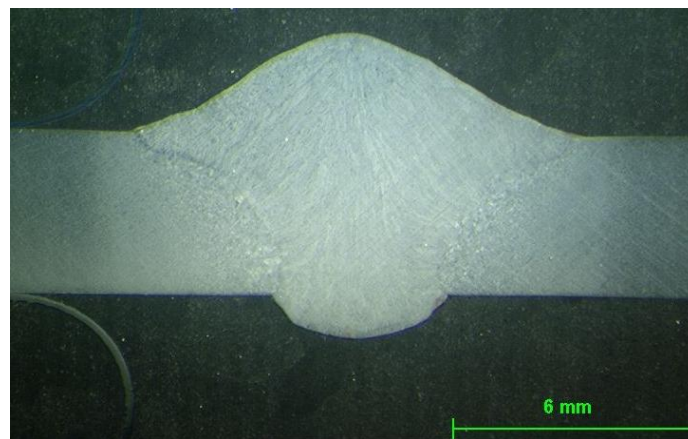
Macro section of 4 mm thick S355 mild steel GMAW butt weld with large cap and small root
